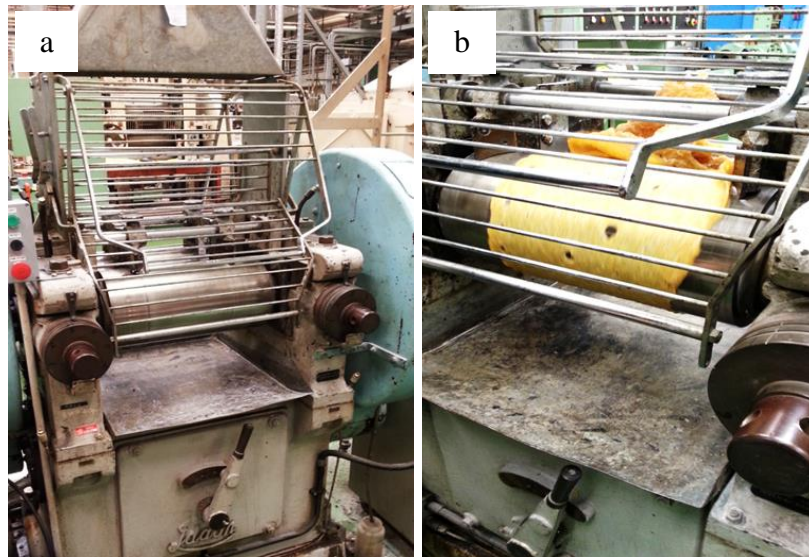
(a) A two roll-mill machine; (b) The compounding process.
